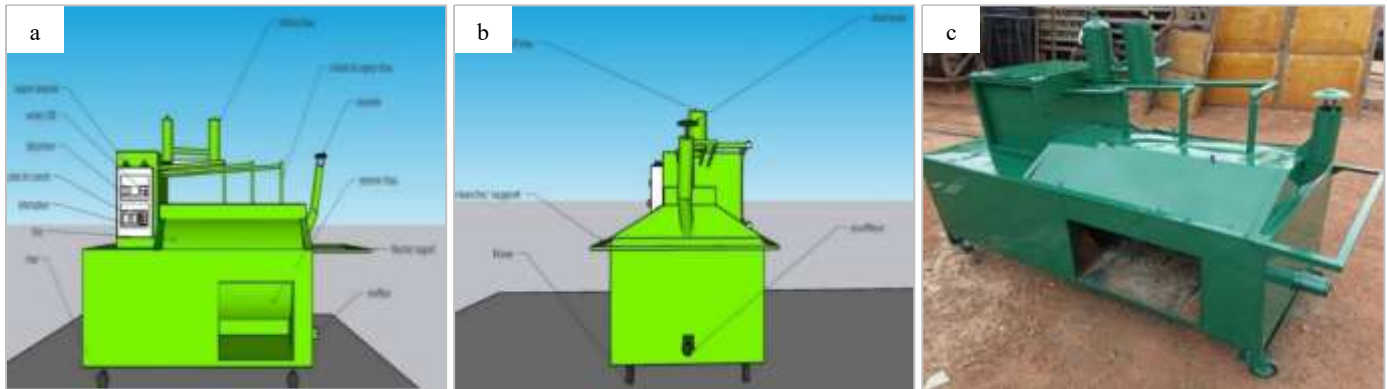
Front view (a) and side view (b) of the designed prototype and the realized prototype (c)
